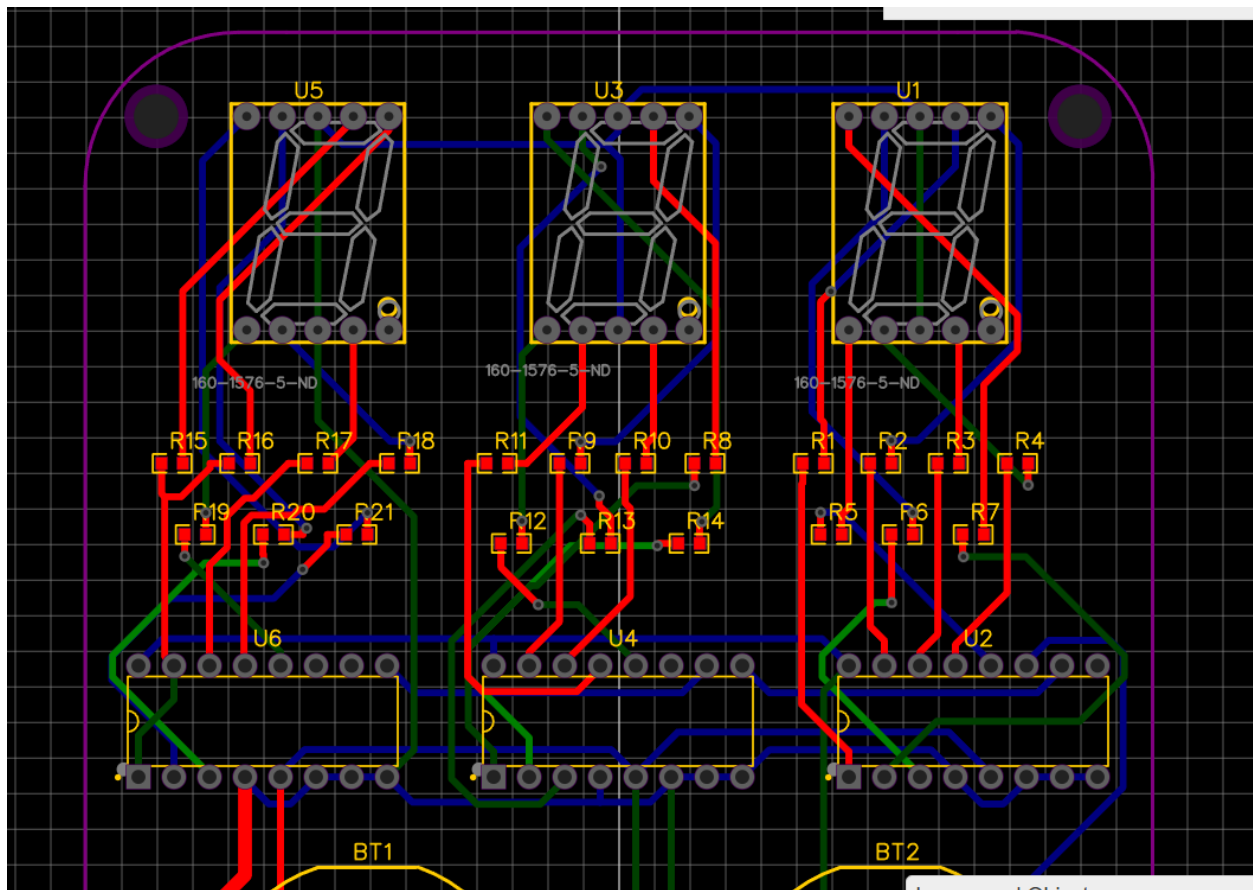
The counter components, Track routes and layouts shown within the boards outline.
